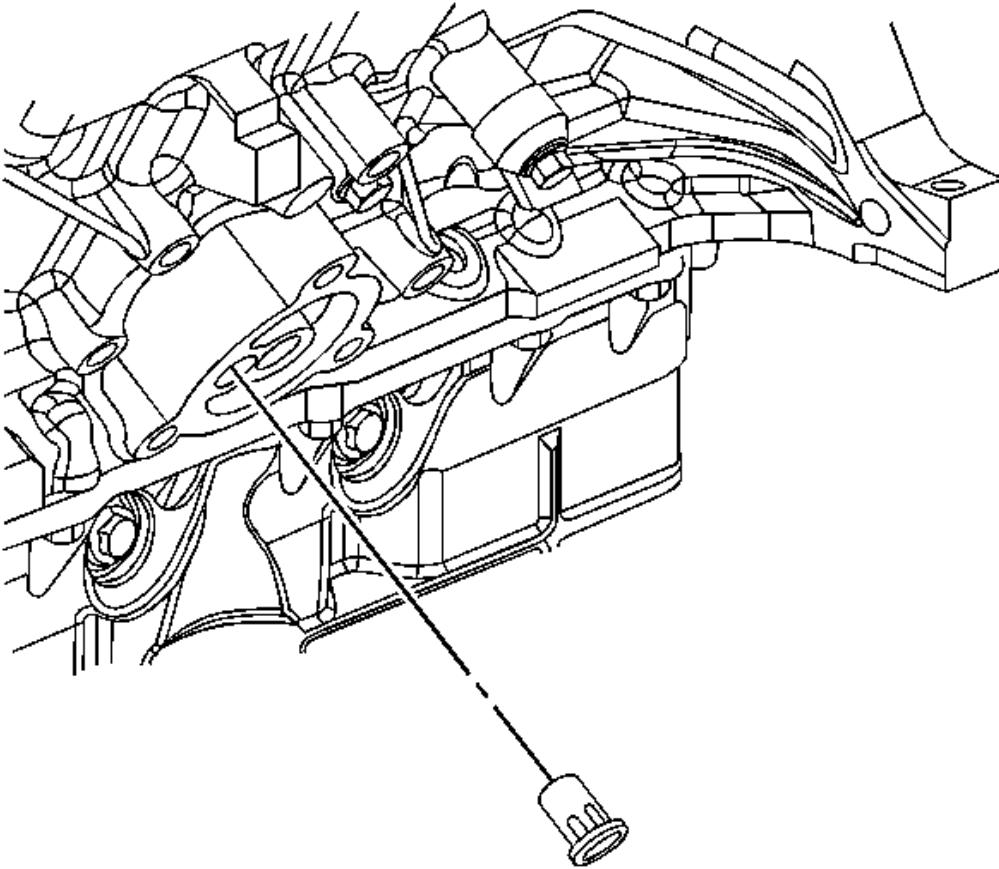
Locating Oil Filter Bypass Hole & Bypass Valve
